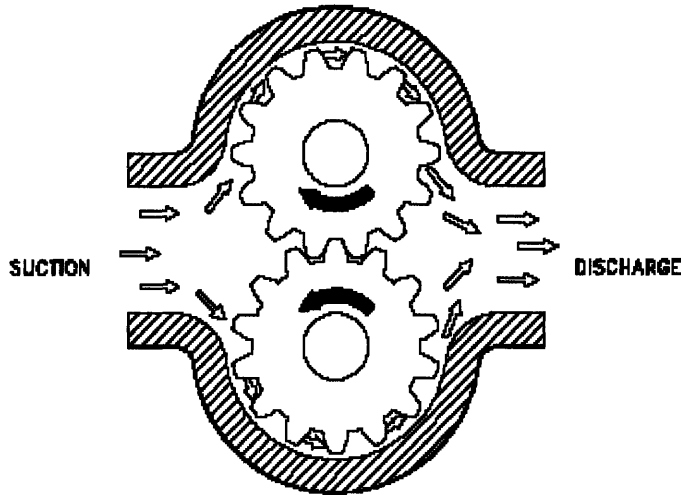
In a gear pump, two tightly interlock gears create a suction head by transferring fluid via the space between gear teeth. The tight tolerance of the gears also prevents fluid backflow within the pump.
